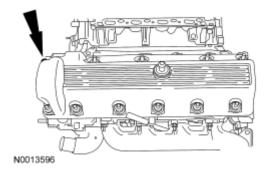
Intake Manifold Sealing Surfaces Courtesy of FORD MOTOR CO.
